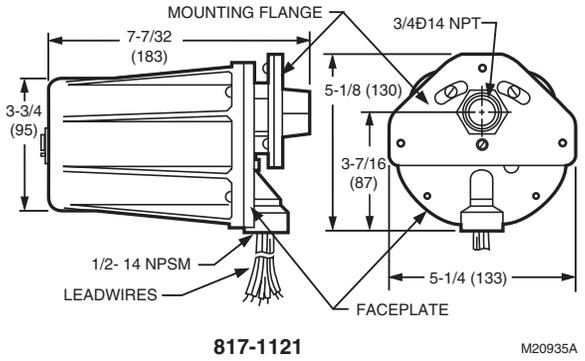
Ultraviolet Self-Check detector, mounting dimensions in inches (mm).
